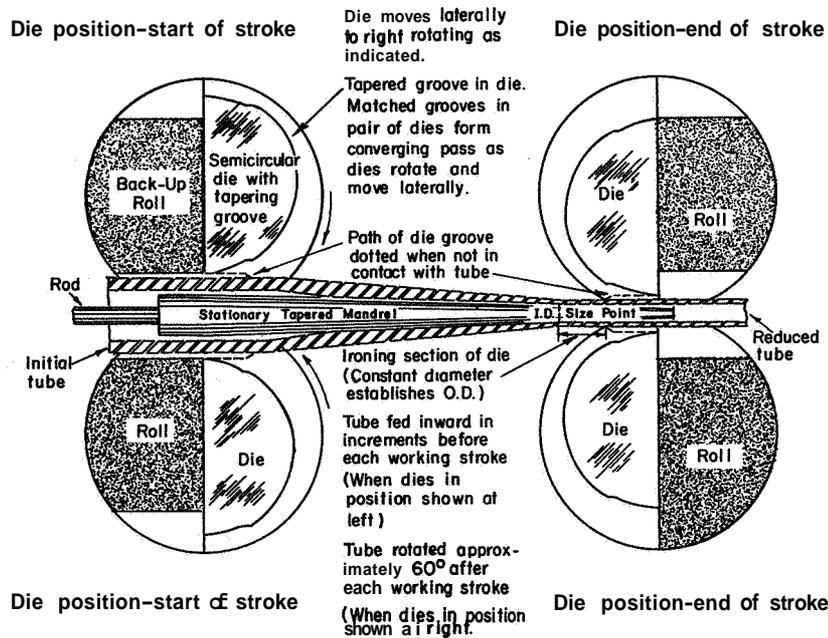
OPERATION OF TUBE REDUCING MACHINE (Ref. 6)
